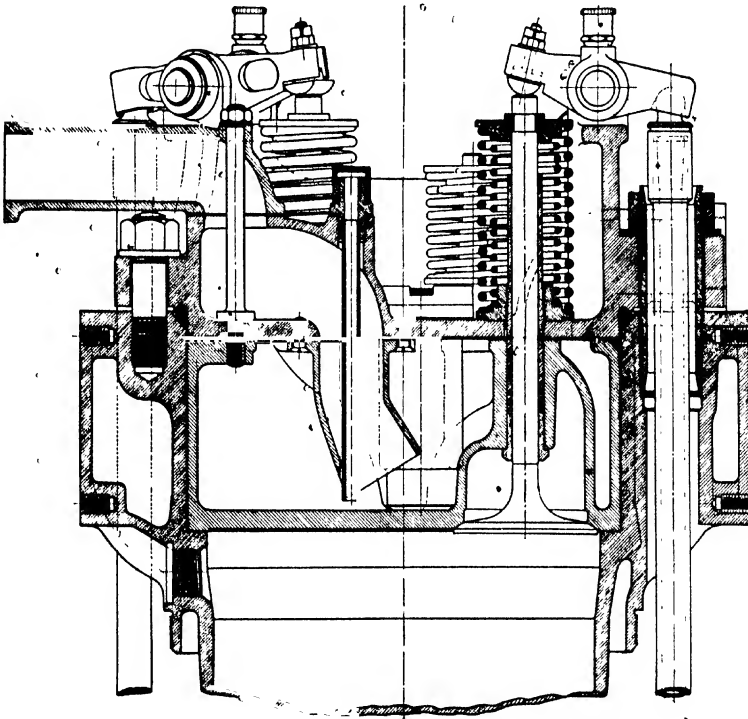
Section of Cylinder and Head, 100 B.H.P. Engine. 8½-inch bore, 9½-inch stroke. Speed, 1150 R.P.M.
